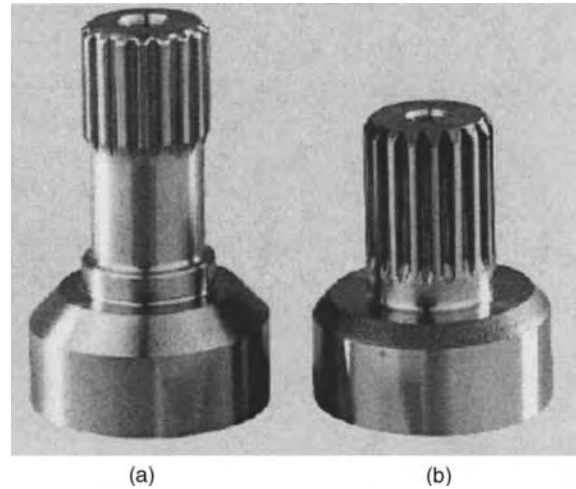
Comparison of (a) machined and (b) cold-forged gearbox endpiece. (Source: D. Landgrebe, *Precision Forming and Machining*, "Recent Developments in Metalforming Technology," ERC/NSM, The Ohio State University, Columbus, 2002.)
